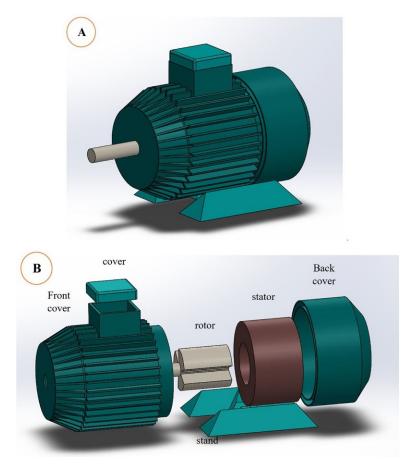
(A) Electric motor body and (B) its parts for horizontal axis centrifugal pump, designed by Solid Works [CAD CAM tutorial (December 17, 2016)].
